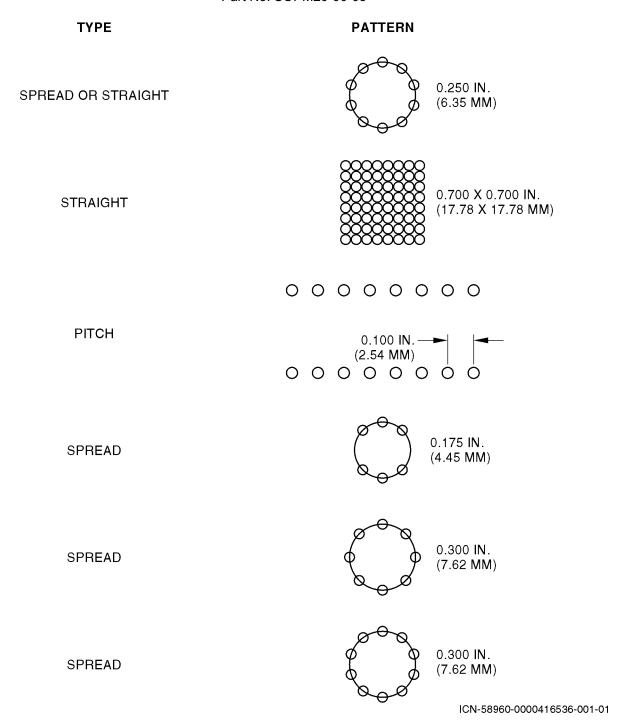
(Sheet 4 of 8) Lead Patterns and Dimensions
